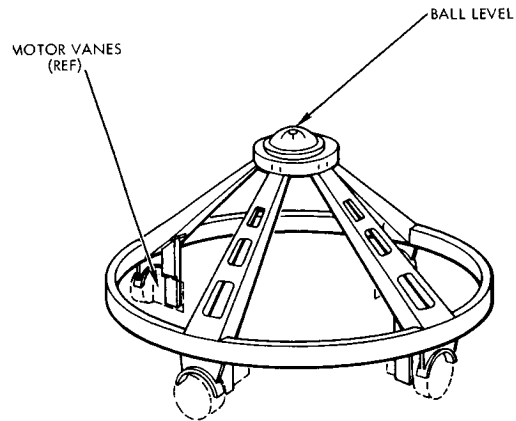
Alignment Fixture, Midcourse Engine/Steering Vanes
